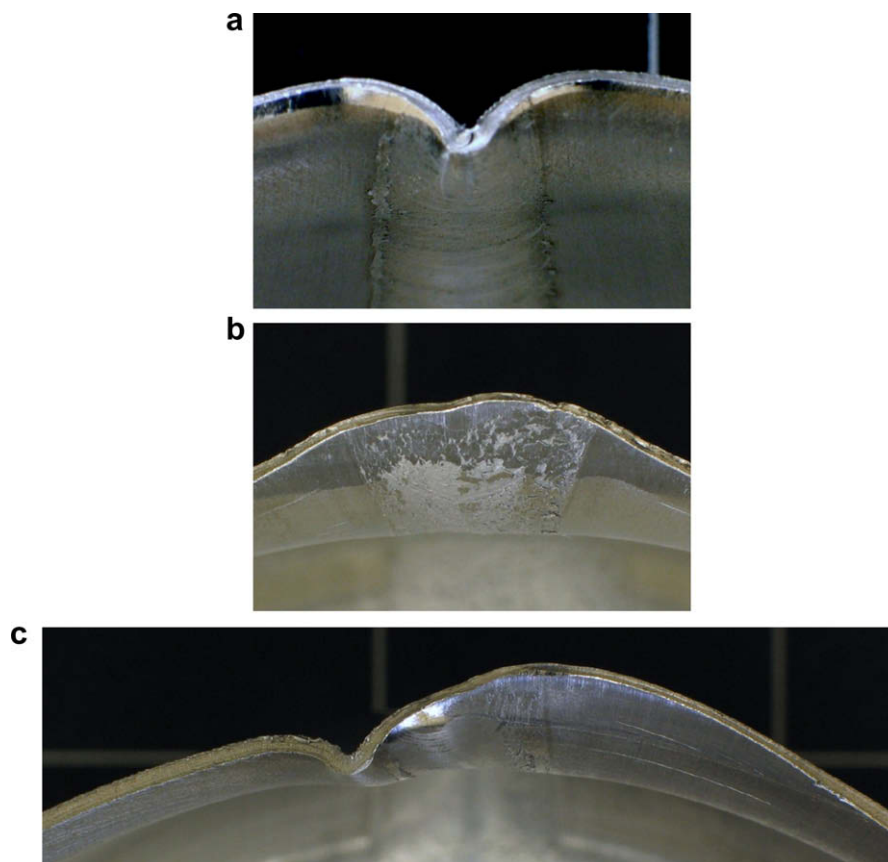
Magnifications of the cups flange near to the S55 (a), S66 (b) and D56 (c) welds.
